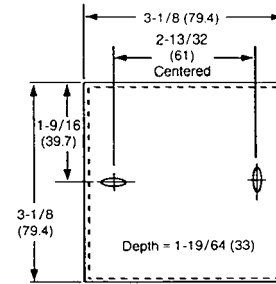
Mounting Dimensions European 1/4 DIN Standard Mounting.
